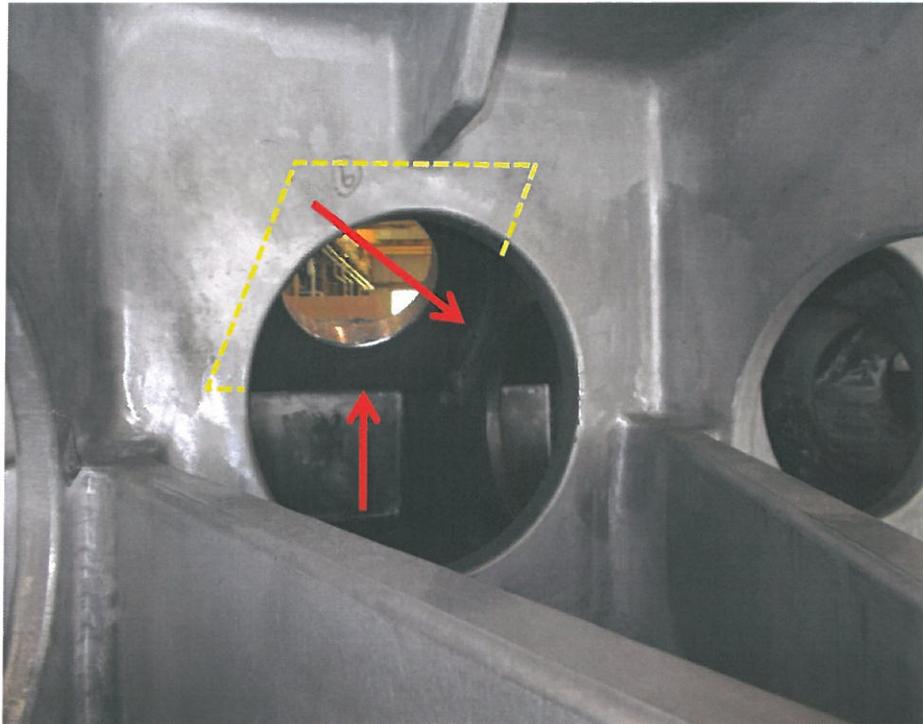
Back Side of Welds around the Perimeter of a Detail 33 Plate as Seen Through Openings in the Outer Perimeter of the MVF Table
